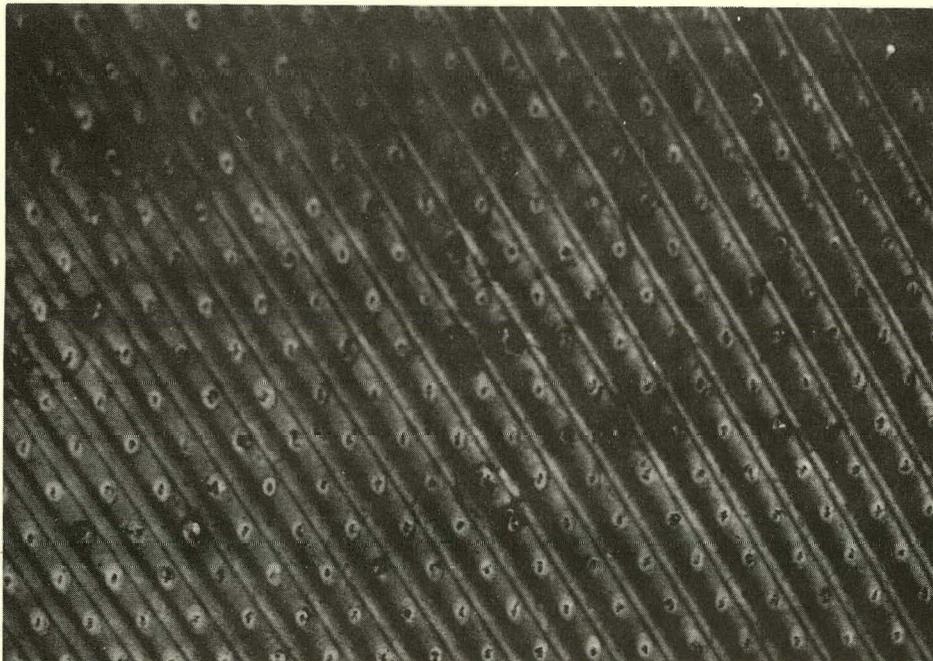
Appearance of Plate Showing Crevice Attack at Contact Points between Individual Plates
